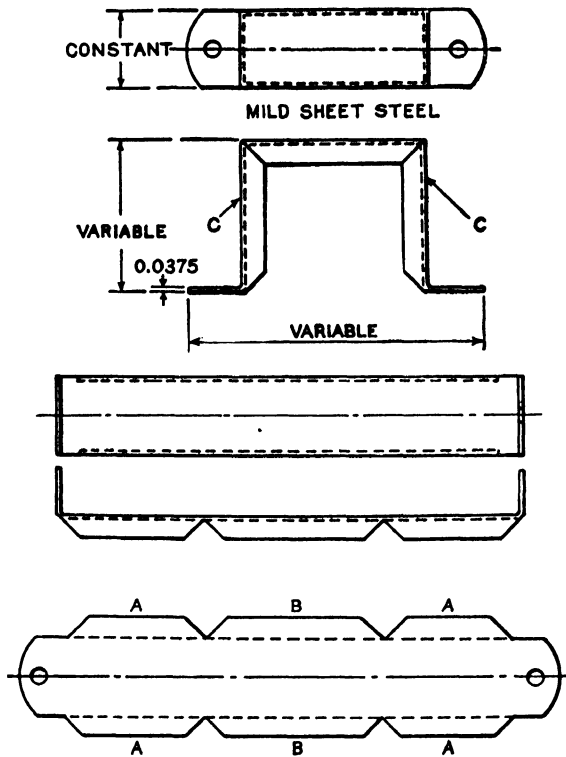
(Upper views) One of four sizes for small transformer-coil frames produced in the die shown in Fig. 98. (Lower view) The blank and partly formed frames.
